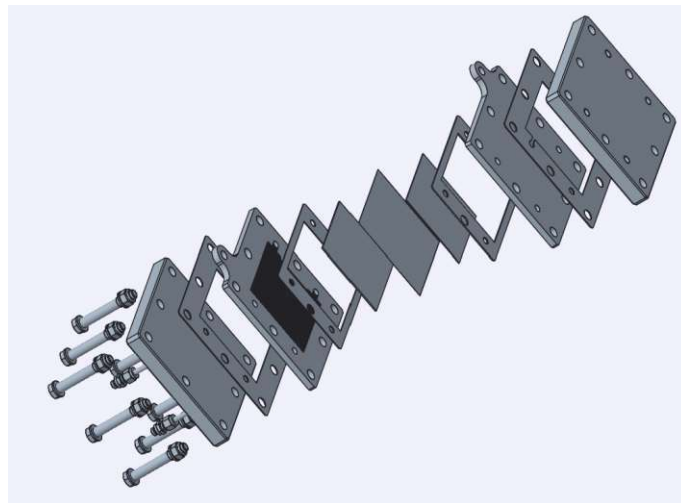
Exploded view from 3.0 Design AEM cell
